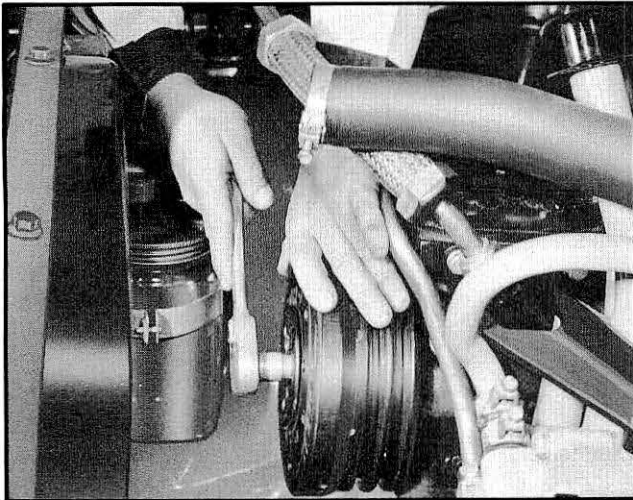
REMOVING LOCKING CAPSCREW AND WASHER
